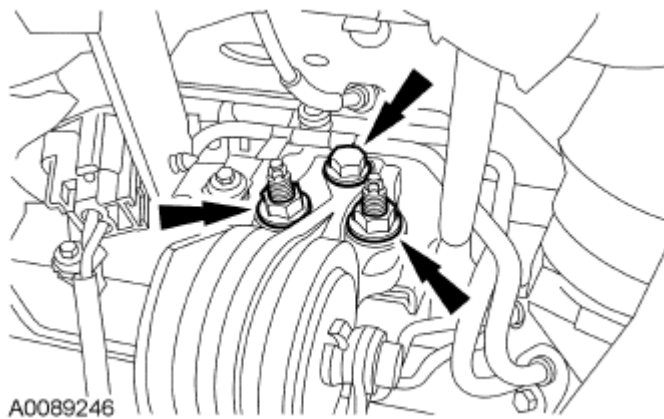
Locating Bolt, Nuts And RH Transaxle Support Insulator
